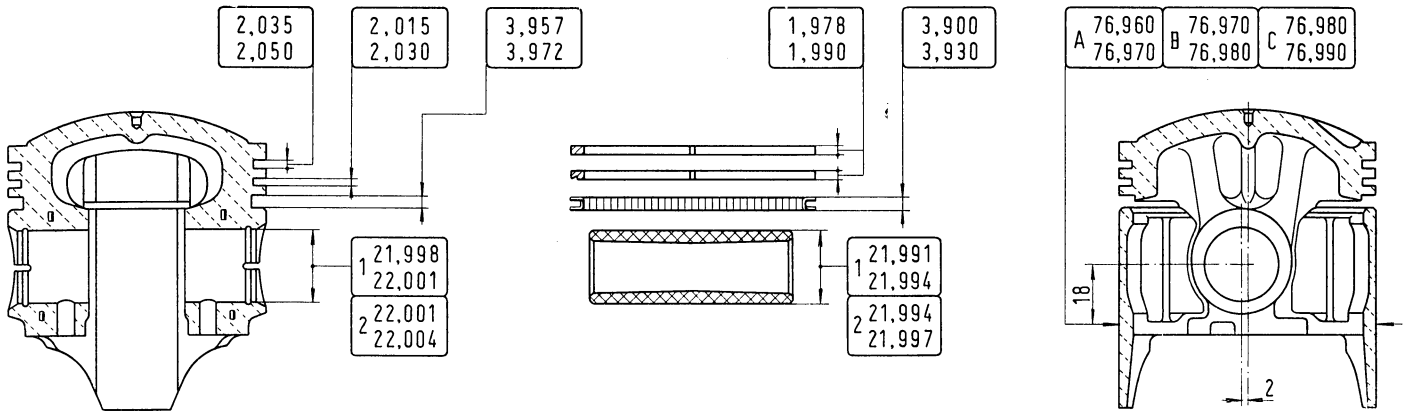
Critical dimensions of pistons, piston pins and rings to suit engine 115 C.005 (in mm).
